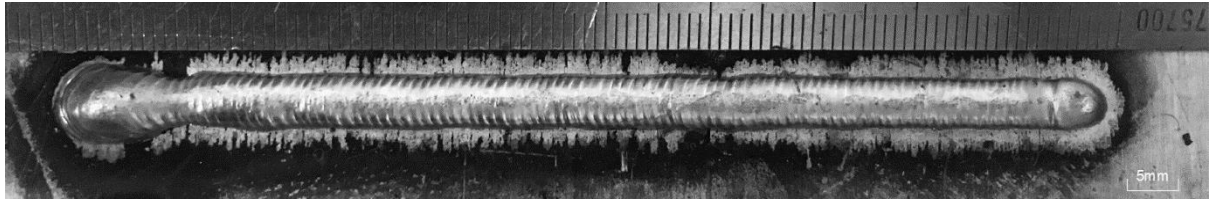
The welding layer with 5.0m/min of feeding wire speed
